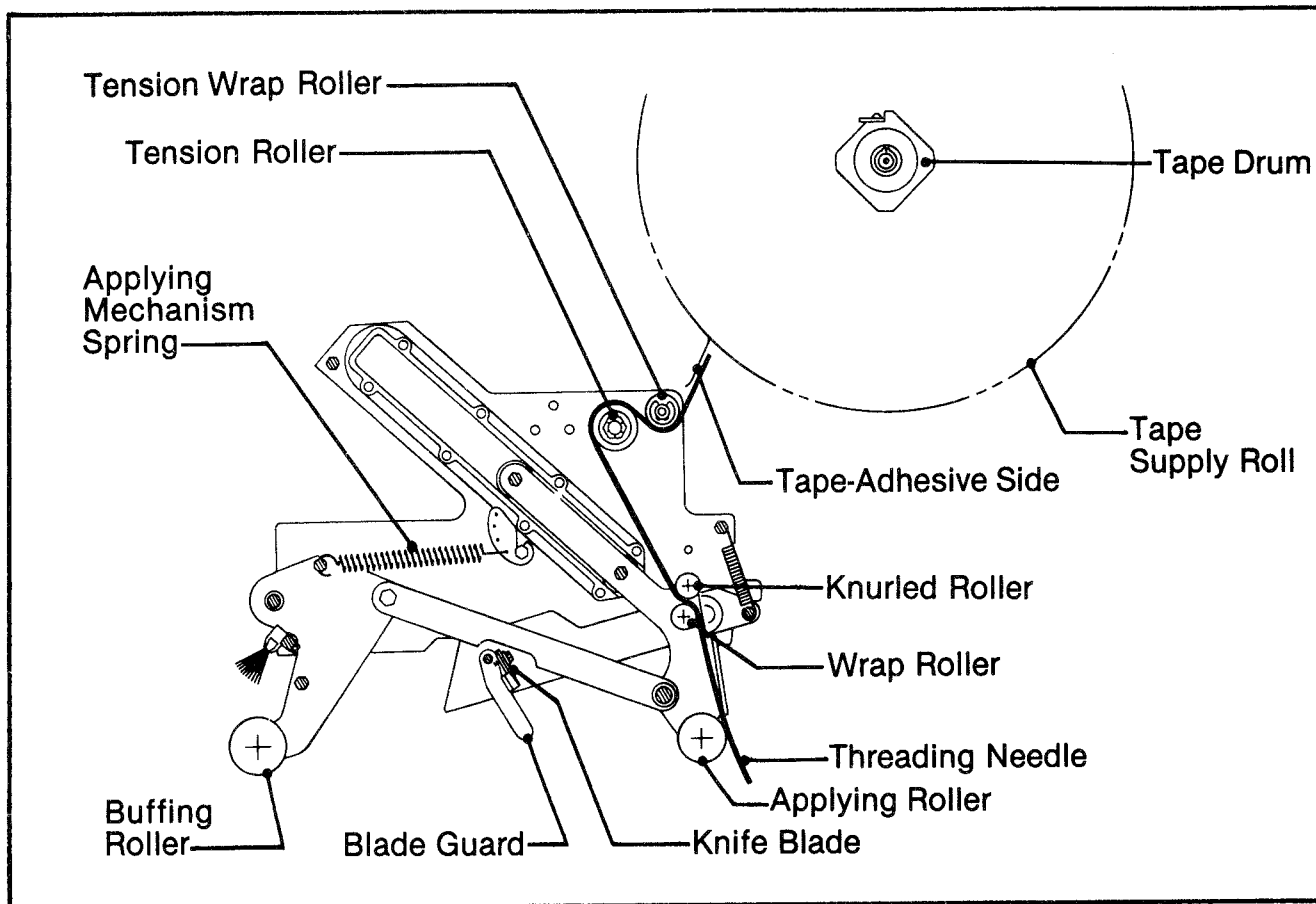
A - Tape Threading Diagram - Top Taping Head - Left Side View
